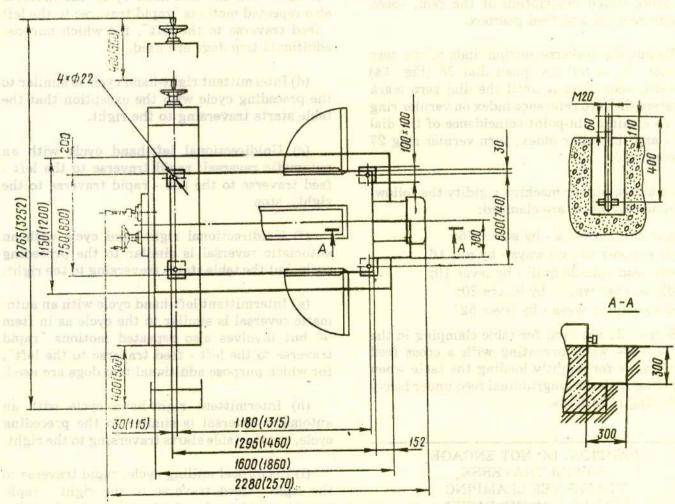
Machine Erection Drawing (parenthesized dimensions refer to the 6T83Ш)
